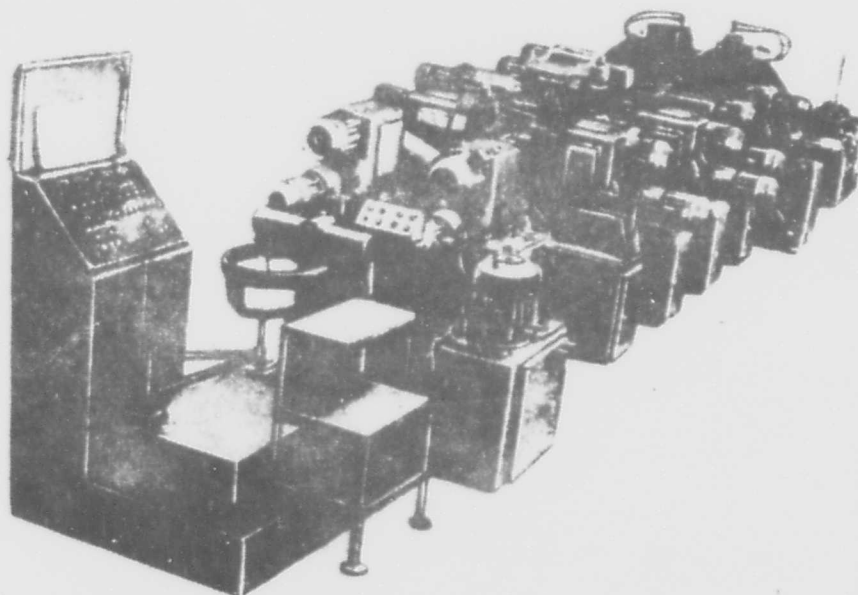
Automatic model readjustable transfer machine ALZL-1 for complete working of surfaces of prismatic roots of compressor guide blades.
